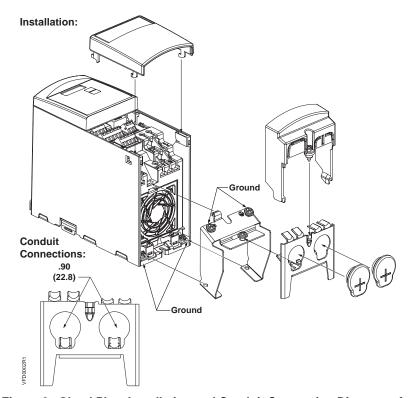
Gland Plate Installation and Conduit Connection Diameters for Frame Size A.
